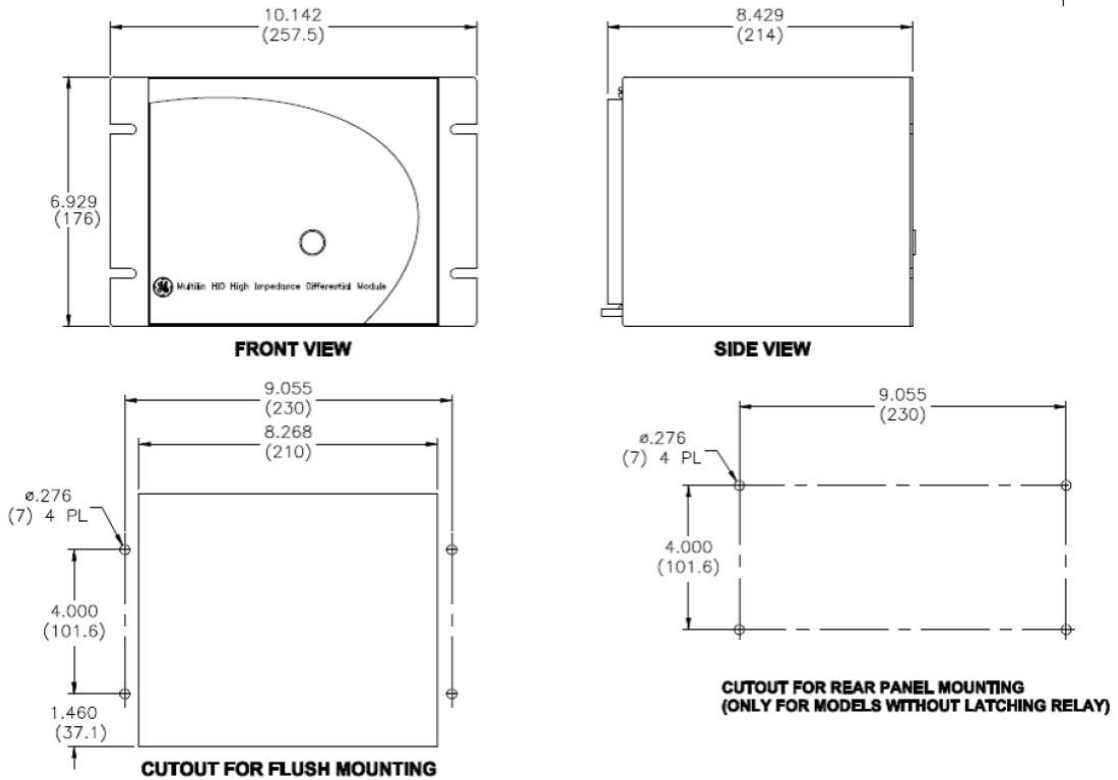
DIMENSIONS AND DRILLING FOR HID MODULE WHEN MOUNTED ALONE
